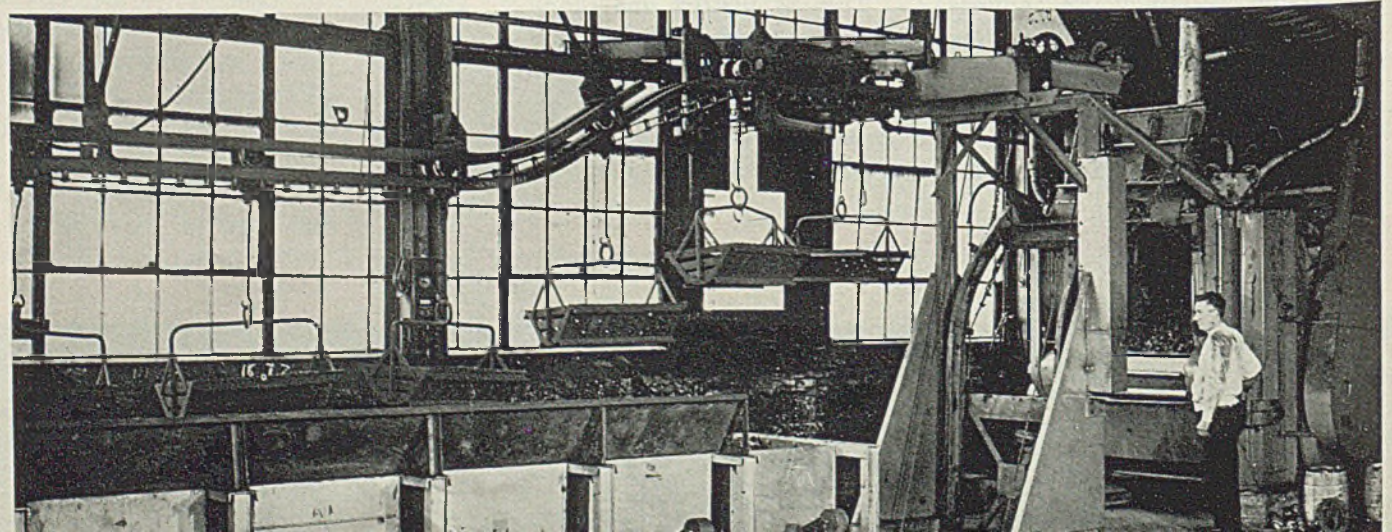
Operators stand on platform behind bins, sort and throw parts into bins. Cleaning machine operator dumps bins, handles loader and runs cleaning machine. Illustrations supplied by American Foundry Equipment Co., Mishawaka, Ind.
